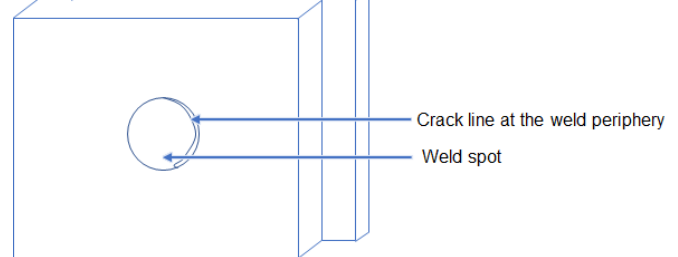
Front view of the welded sample with a crack line at the periphery of the weld spot
